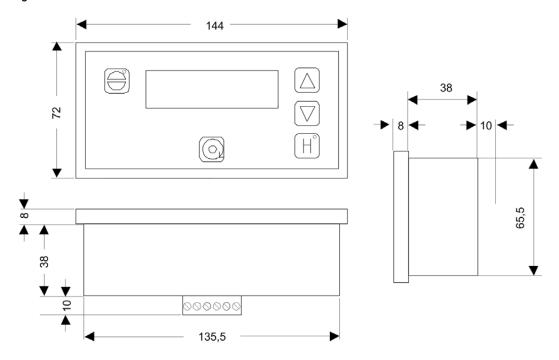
Dimensional drawing customer interface ETAMATIC OEM / ETAMATIC S OEM
